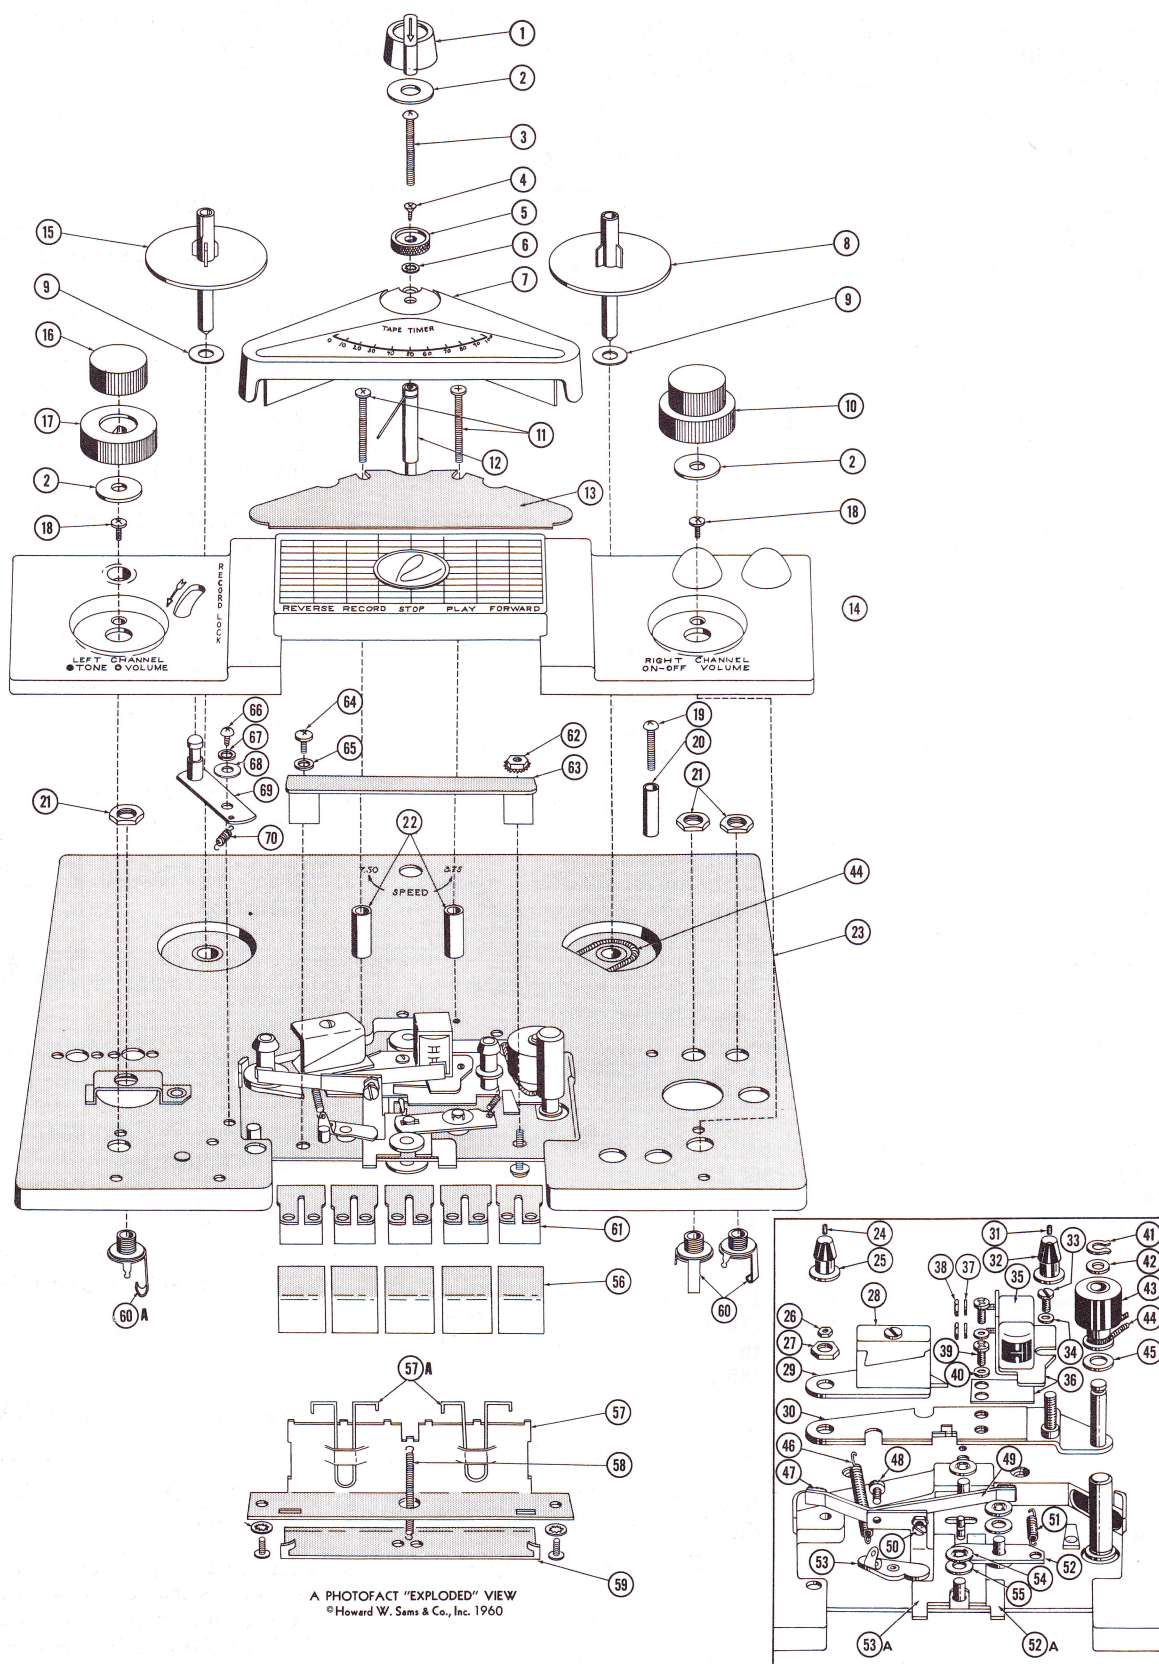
A EXPLODED VIEW OF PARTS ABOVE BASEPLATE
